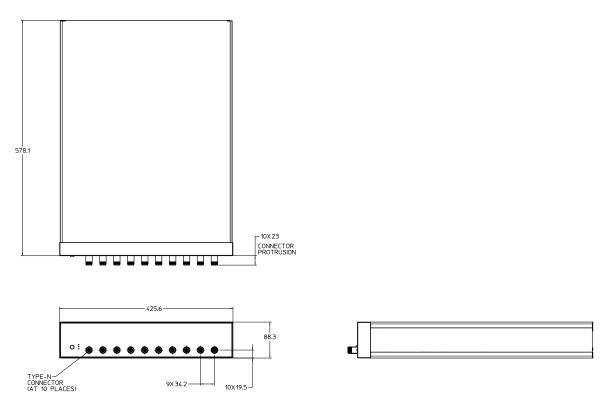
Product dimensions for J7205A/B (Option 001, Type-N connectors)
